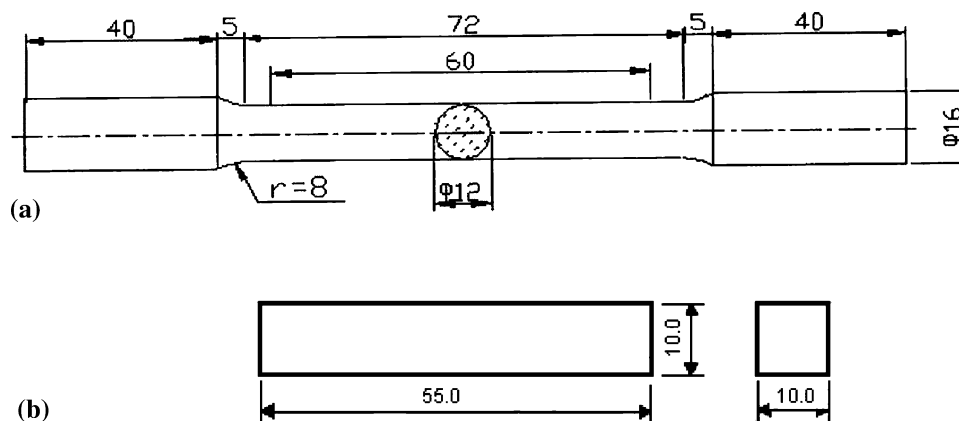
The sketch of specimens and its geometry dimensions (a) Tensile specimens. (b) Impact-testing specimen
